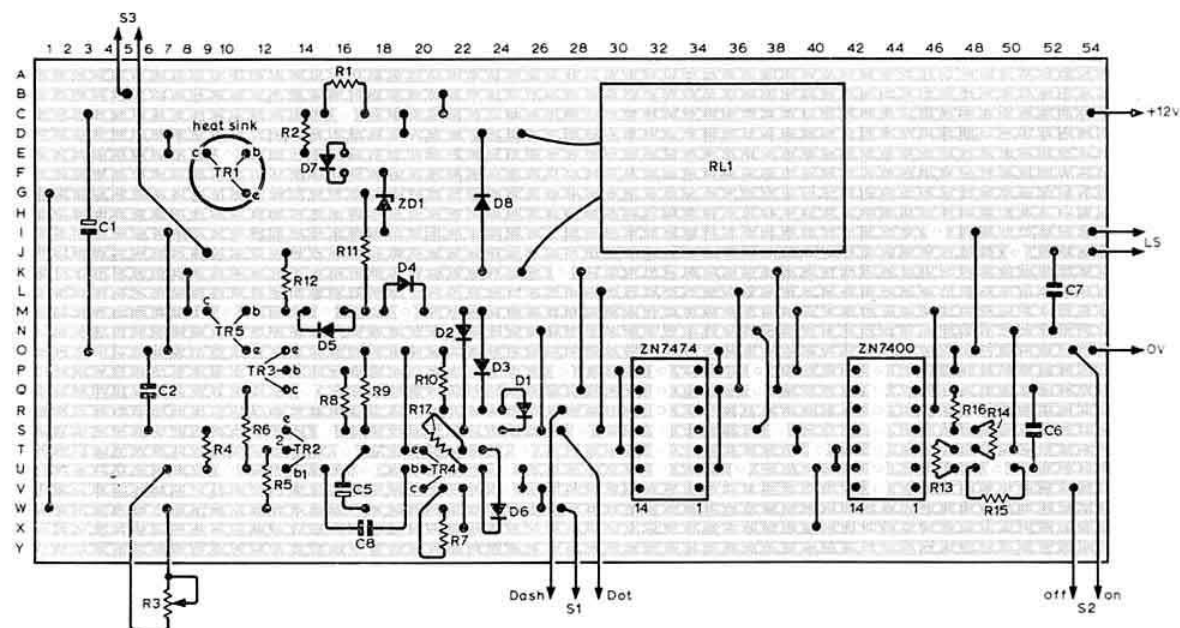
Suggested layout of components on 0.1in Veroboard. Position of breaks in the copper strip are clearly shown
